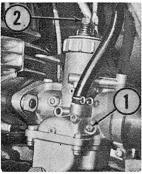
View of the carburetor used on early 250cc models. Idle mixture is adjusted at needle (1) and idle speed at adjuster (2).
